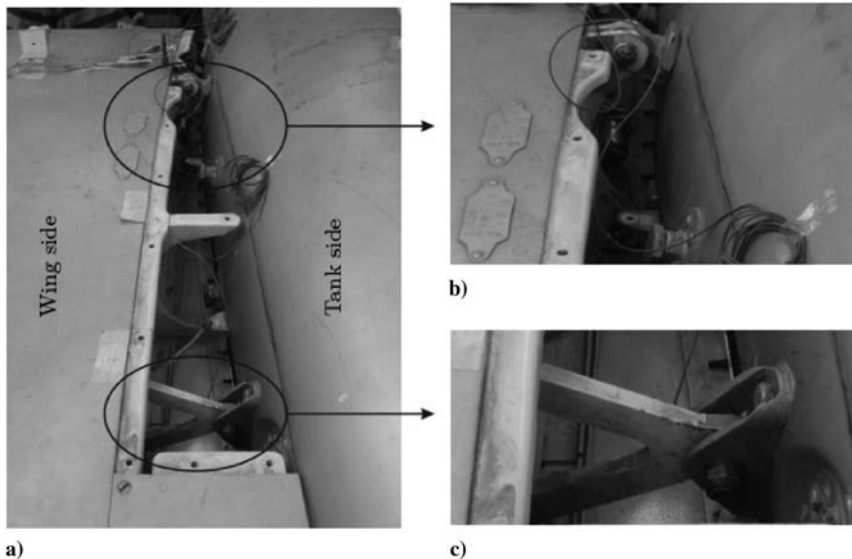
a) Connection between external fuel tank and wing tip (top view). Close-up of b) front- and c) rear-bolted attachments.
